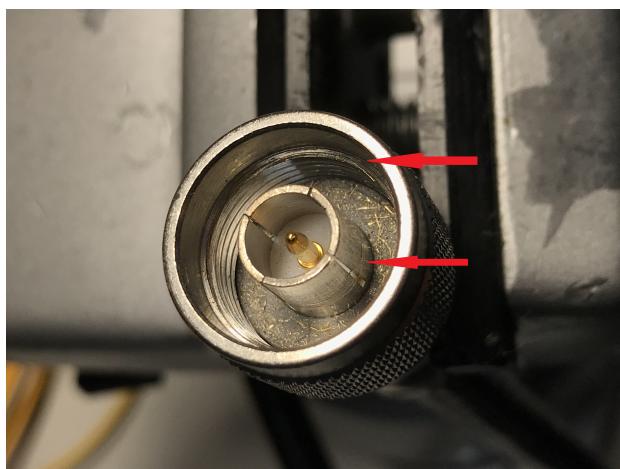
Cable connector showing signs of damage on the thread and RF fingers.
